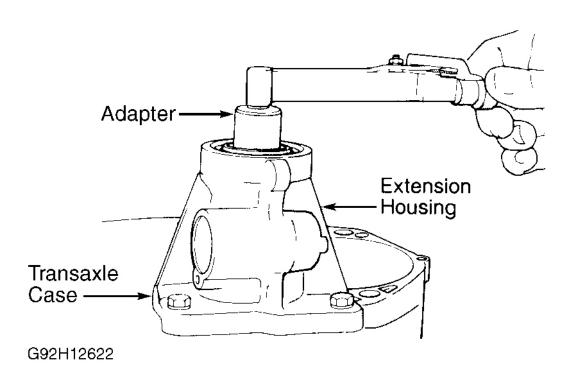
Checking Differential Rotating Torque Courtesy of CHRYSLER CORP.
